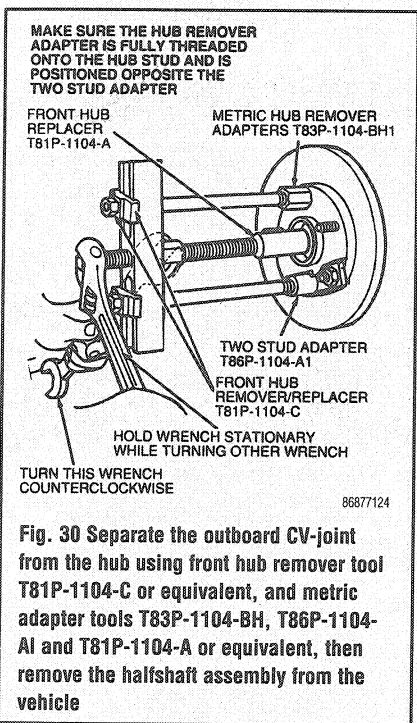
Separate the outboard CV-joint from the hub using front hub remover tool T81P-1104-C or equivalent, and metric adapter tools T83P-1104-BH, T86P-1104-AI and T81P-1104-A or equivalent, then remove the halfshaft assembly from the vehicle
